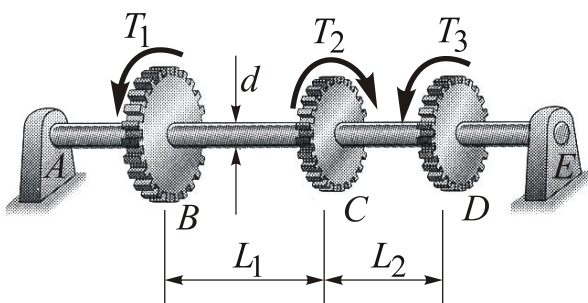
Solid steel shaft turns freely in bearings at A and E points. It is driven by a gear at C point. T_1 and T_3 are resisting torques
